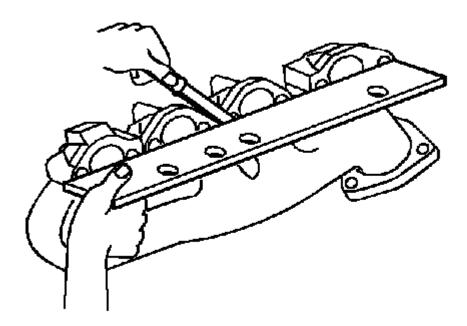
Measuring Exhaust Manifold To Cylinder Head Surface For Warpage Courtesy of GENERAL MOTORS CORP.
